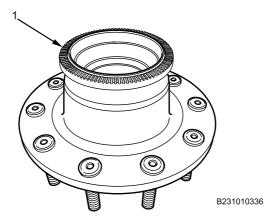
Antilock Brake System (ABS) Tone Ring Inspection
